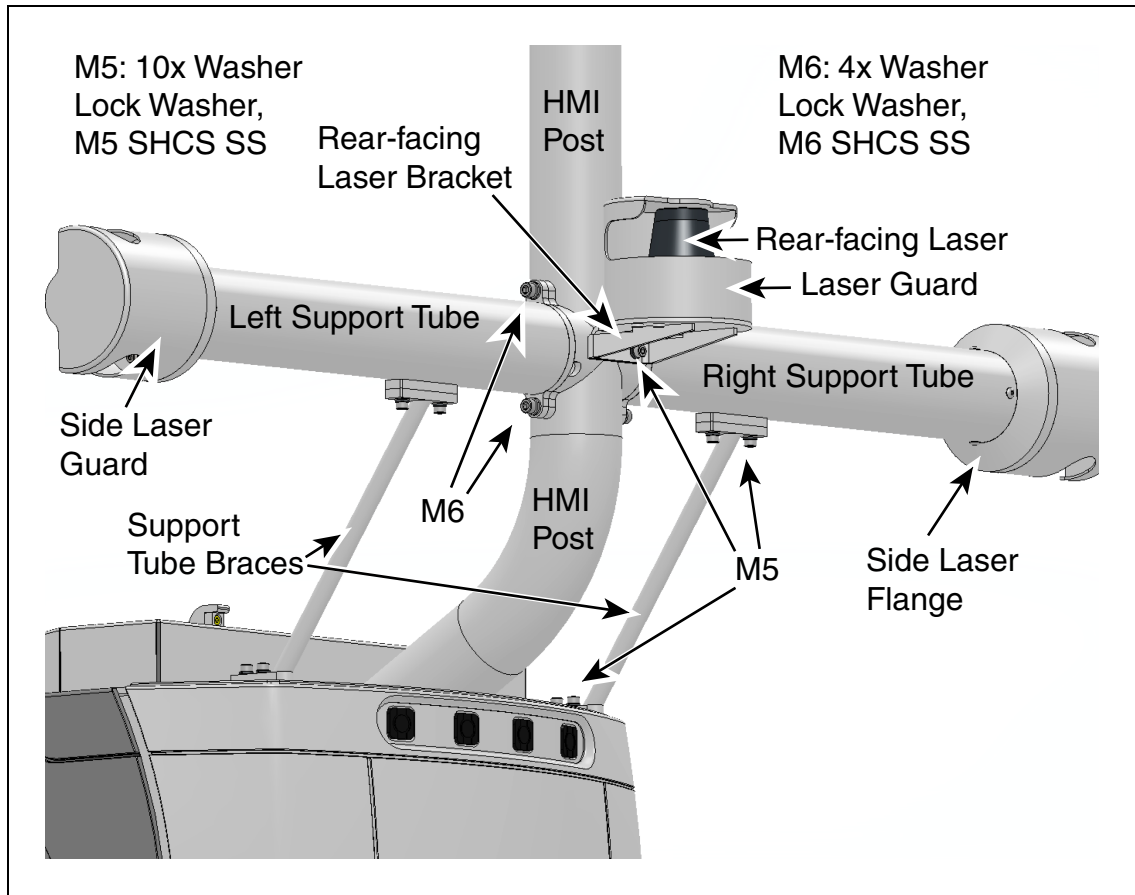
Side Lasers, Support Tubes, Rear-facing Laser
